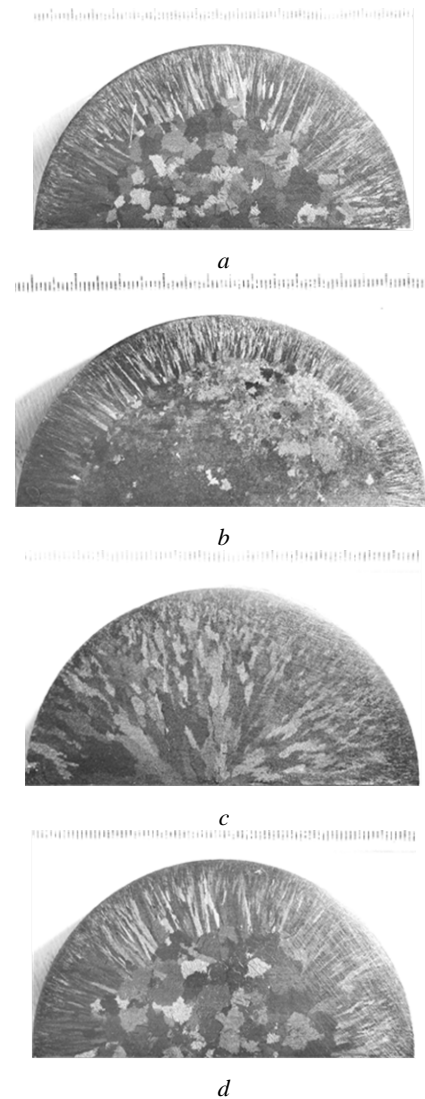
Macrostructure in the cross-section of the middle part of 80 mm diameter rod blanks made of ZhS32-VI alloy, produced on a ULVAC FM-1-2-100 unit before heat treatment:
